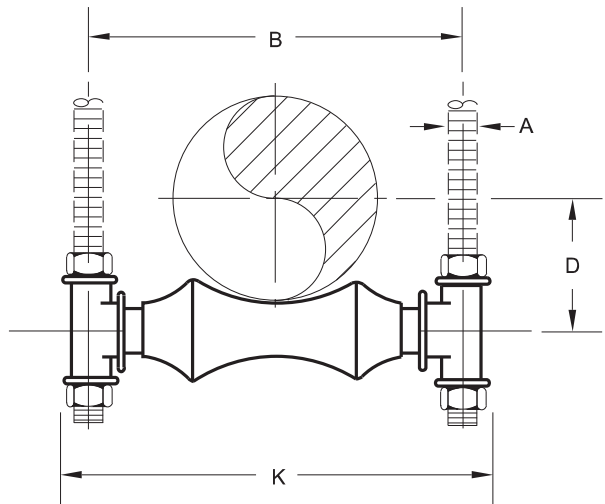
ADJUSTABLE ROLL SUPPORT
